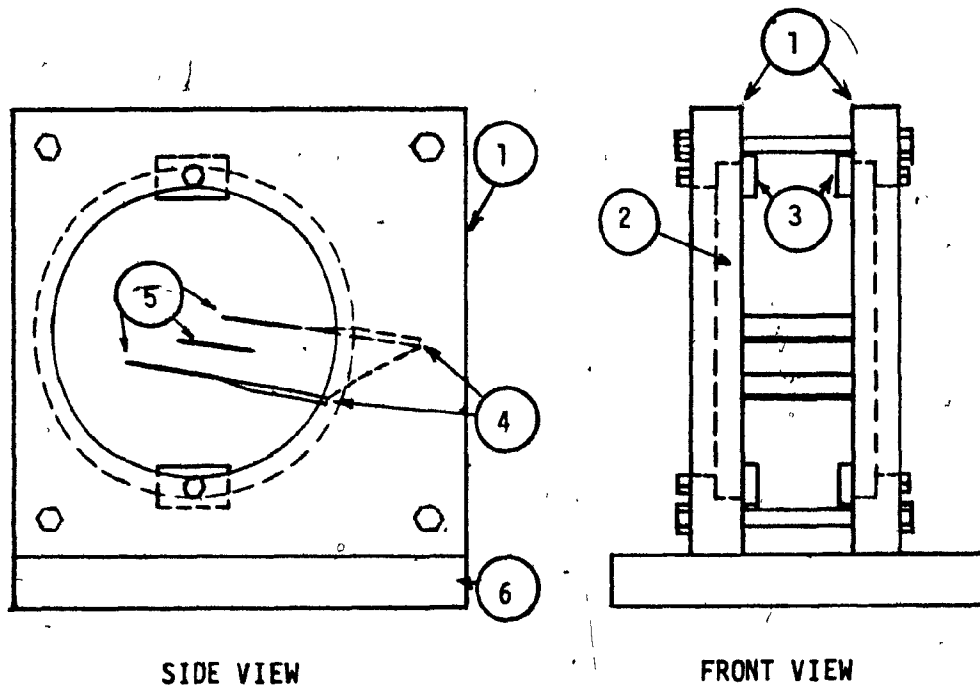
The Cylindrical Shock Tube And Its Auxiliary Equipments.
